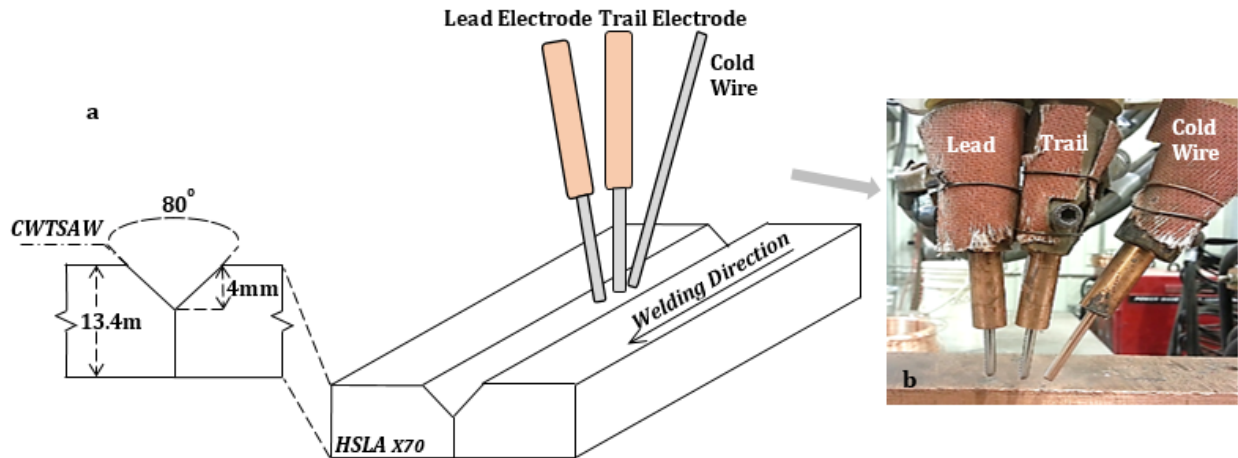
CWTSAW process setup. (a) Schematic view of joint configuration along with the positioning of the electrodes and cold wire and (b) welding setup designed at Evraz Inc. NA.
